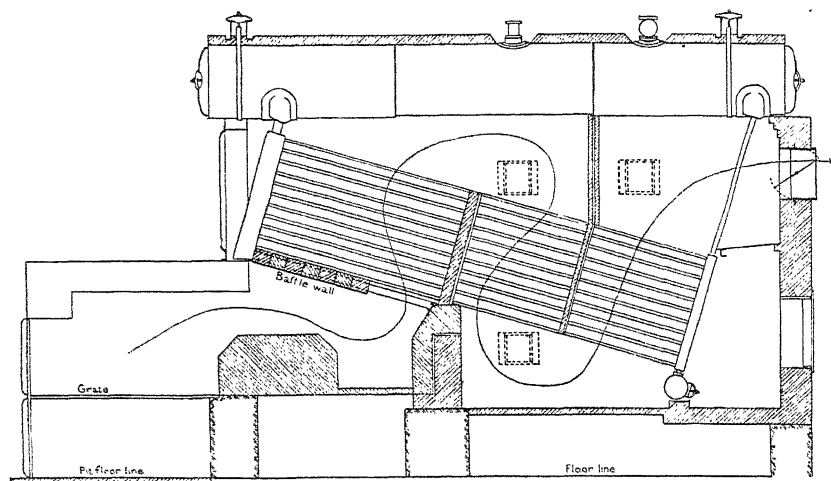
IDEAL SECTION SHOWING ADDITIONAL BAFFLE WALL AND AN ELONGATED FIRE BOX.
